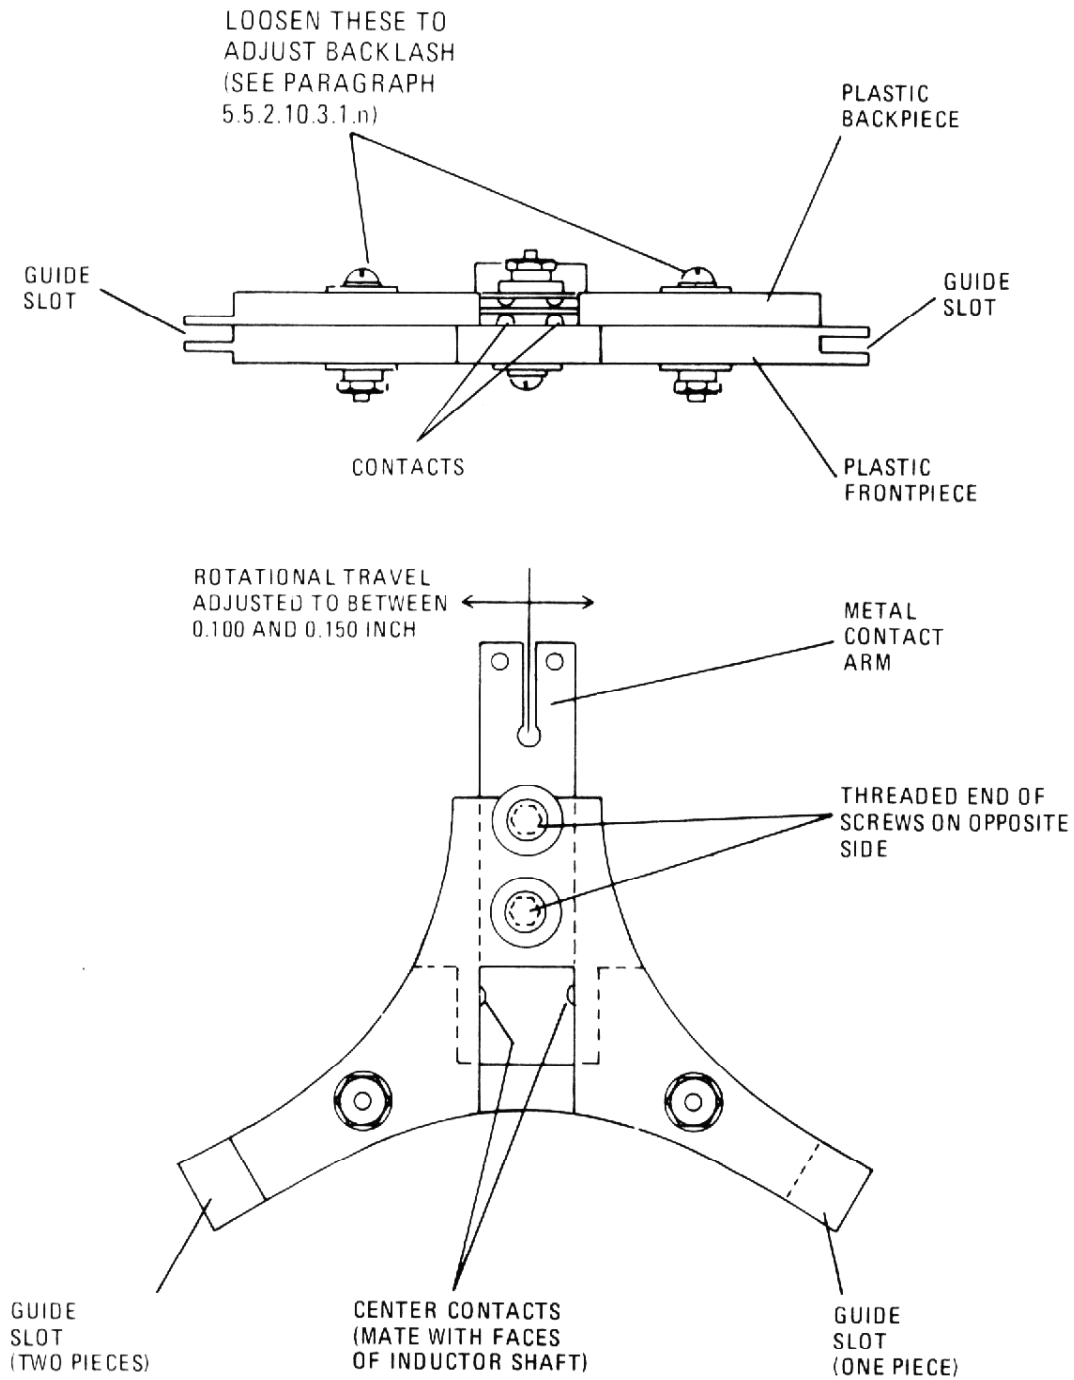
Rotor Assembly 1A2MP3 Detail View
